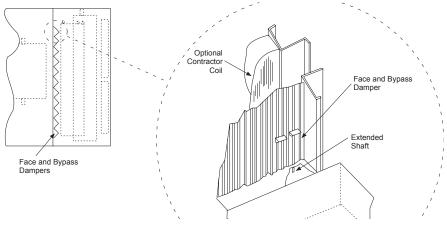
Face and Bypass Dampers, Flat Arrangement—RAH 047C–077C Only
